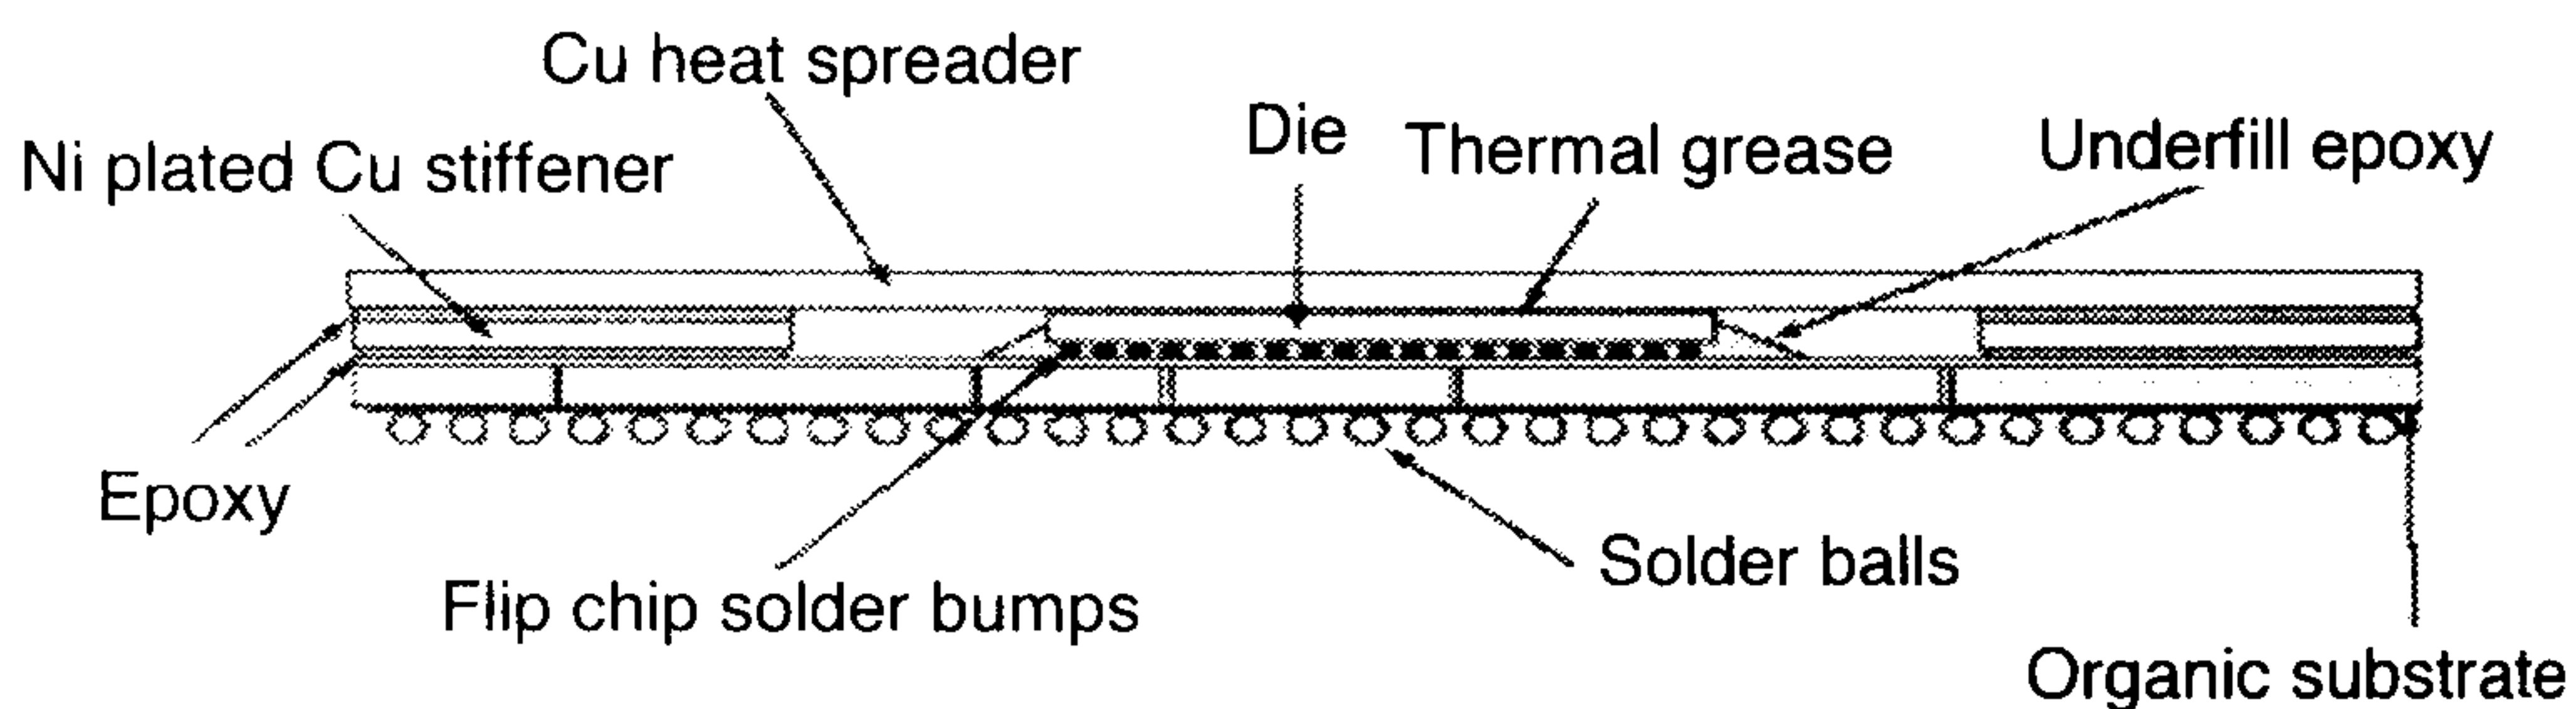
A BGA with flip chip bonding designed to enhance heat transfer from the chip's back side.
